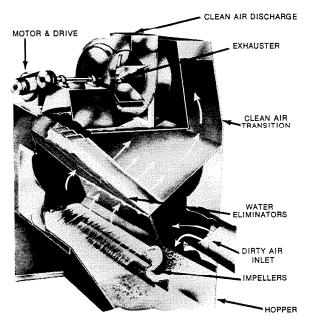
Cutaway section of typical Type N RotoClone Design 2 and 3 Arrangement C size 1½ thru 6.
